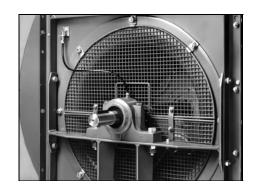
Self aligning double row bearing in a Plummer block housing
